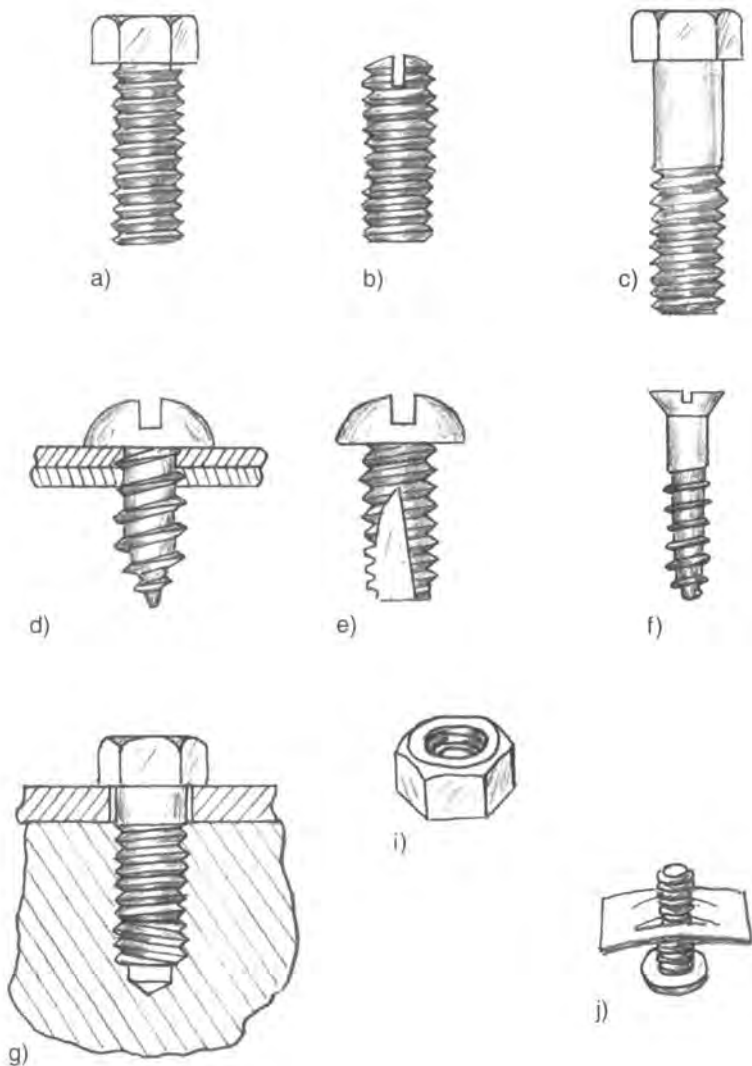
F4a A collection of threaded fasteners: a) hex-headed machine screw b) headless set screw, c) hex-headed bolt, d) thread-forming sheet metal screw, e) thread-cutting screw for plastics and soft metals, f) flat-head wood screw, g) cap screw assembly (in threaded hole), h) hexagonal nut, i) speed nut and screw.
